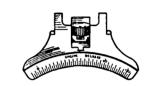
Delco-Remy 8 Cyl. Synchroniz-ing Tool #1835009 for Series 668 Distributors.
